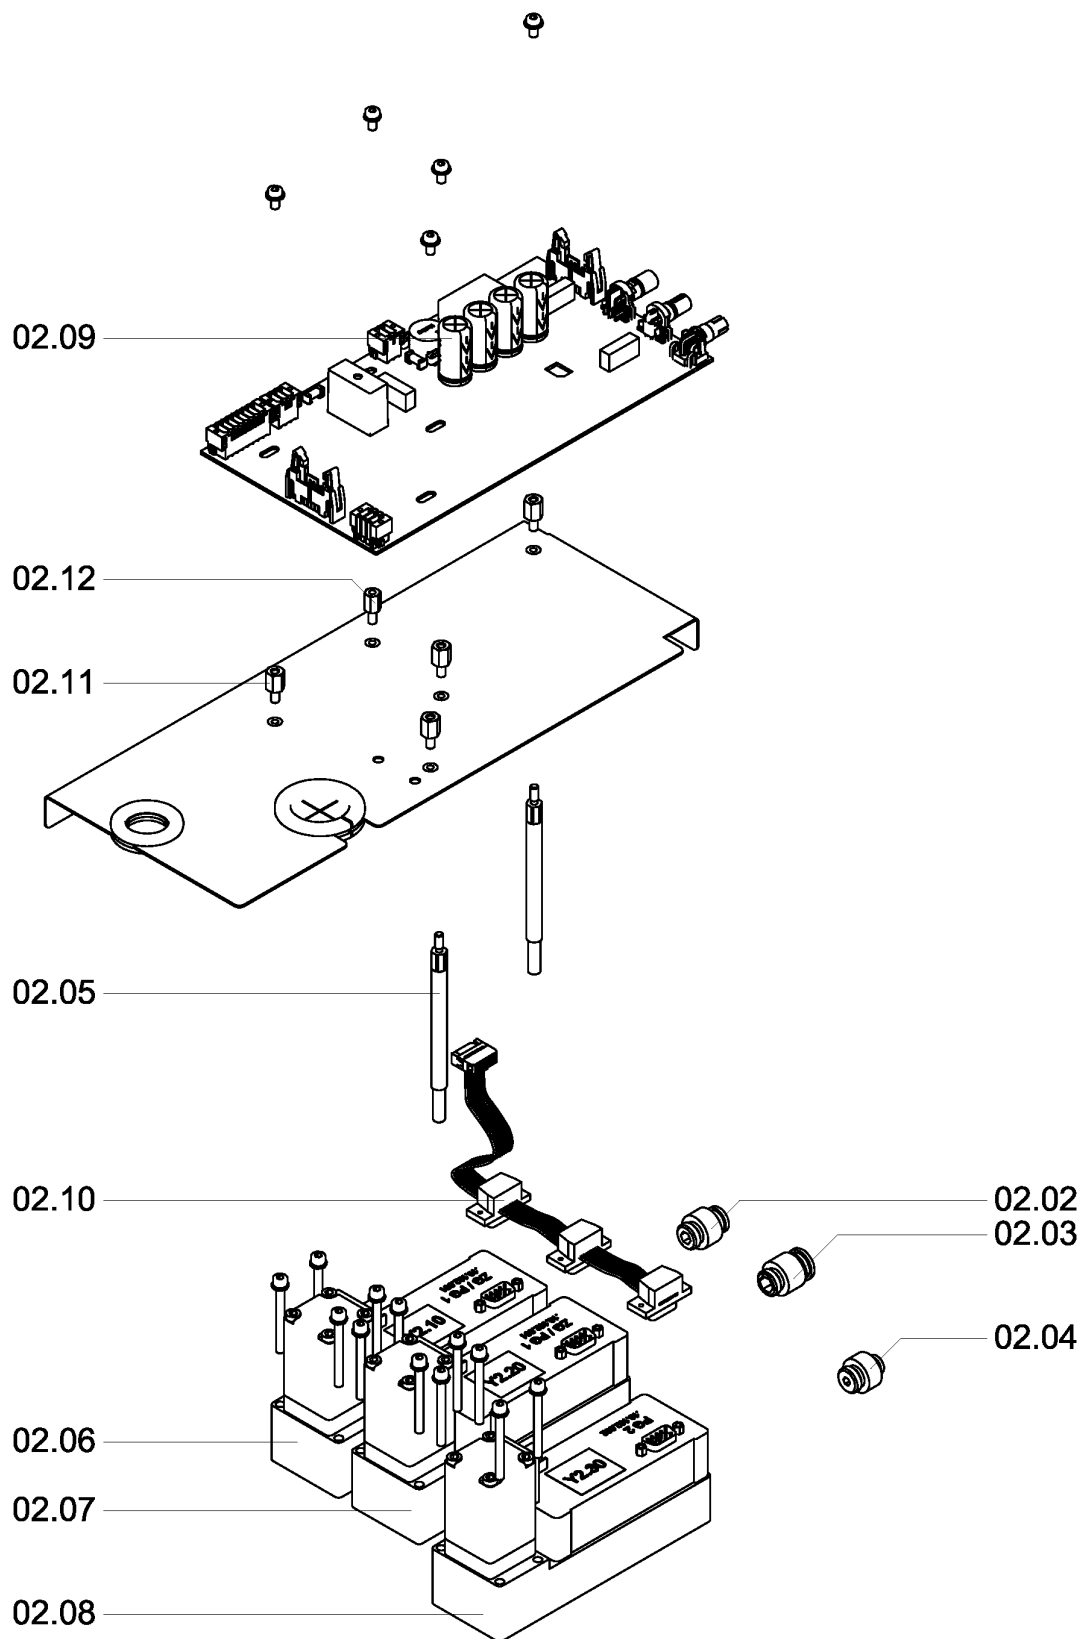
Spare parts overview iQ-Port 4500, part 2
